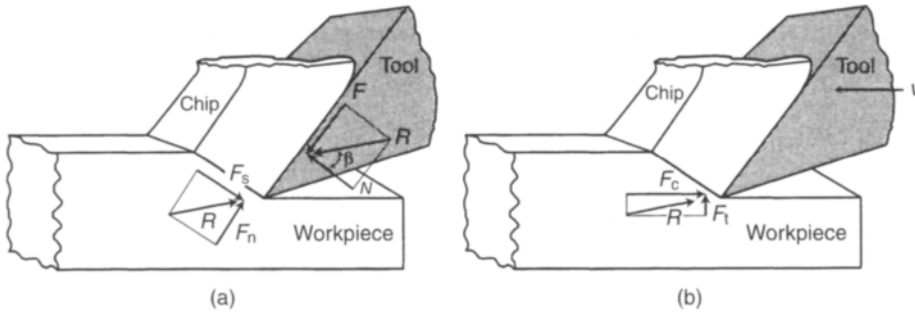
Forces acting on chip and workpiece during orthogonal cutting.
